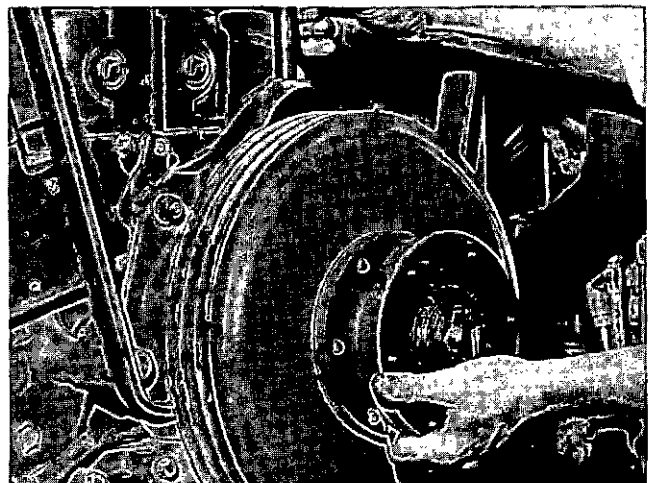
, V40038. Loosening fan hub adjusting screw
